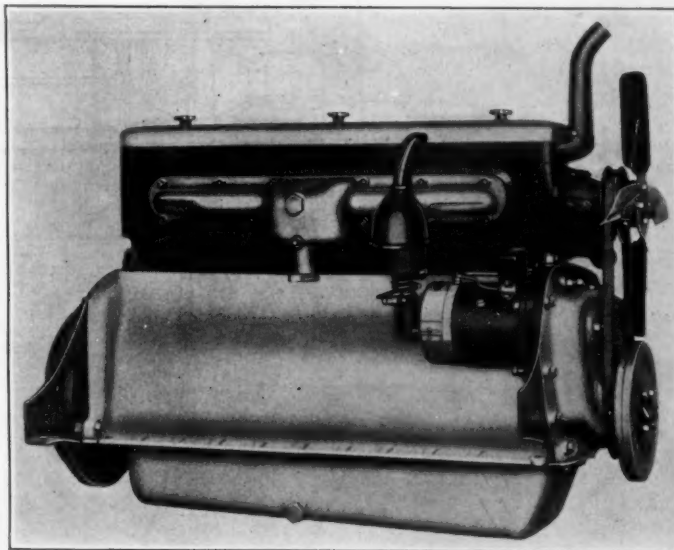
RIGHT-HAND VIEW OF EIGHT-CYLINDER CONTINENTAL-TYPE SINGLE-SLEEVE-VALVE ENGINE
